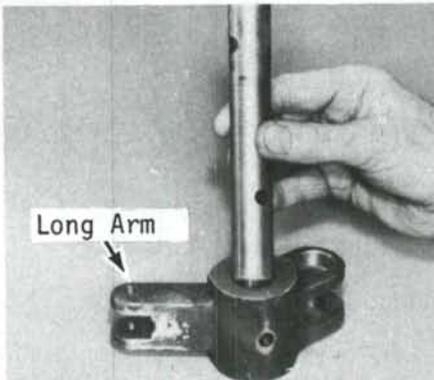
To assemble bellcrank and pivot shaft for right-hand brake, position long arm of bellcrank as shown and install end of shaft with hole farthest from the end into bellcrank hub.
